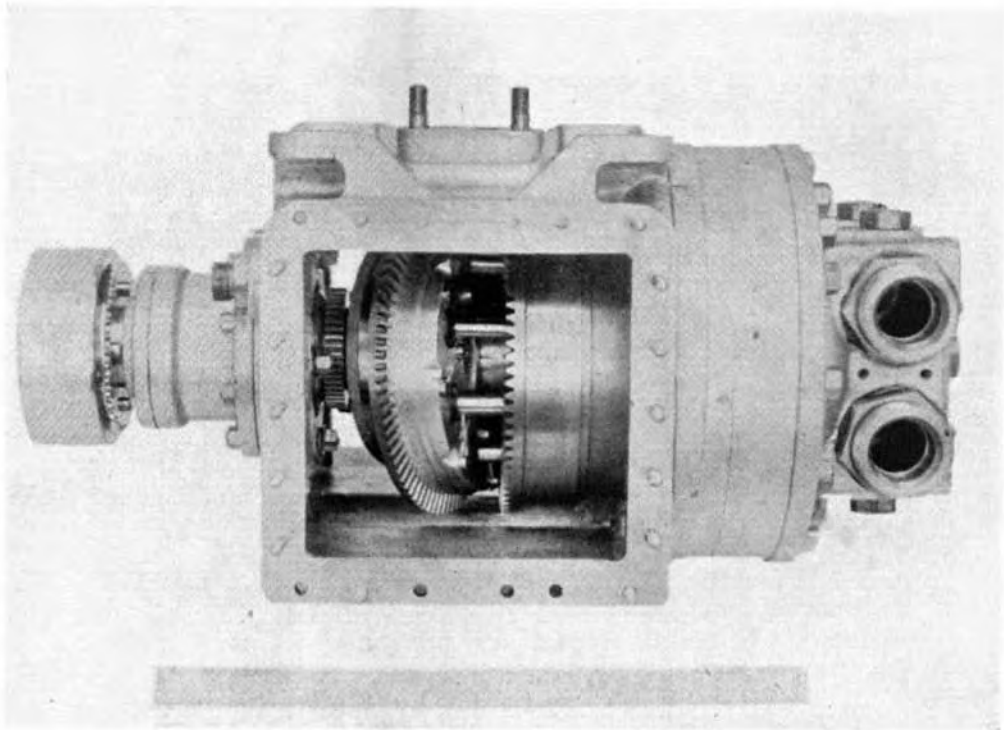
“G” TYPE MOTOR FOR A.R.L. POWER DRIVE. ASSEMBLY WITH COVER REMOVED TO SHOW BEVEL CONSTRAINT OF SWASH
